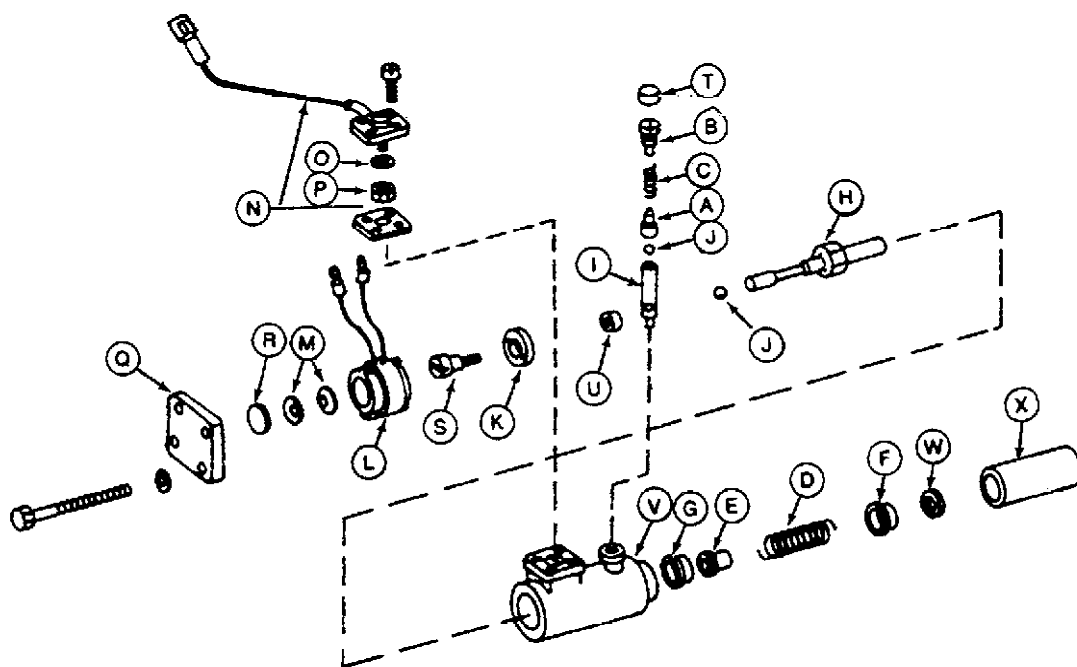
B—Control Valve—Boom Section (Later Units and 355)
